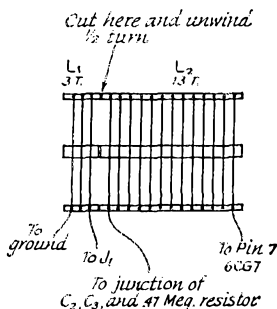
Drawing of the L-match coil assembly. The assembly is made from a single length of B & W Mini-inductor coil stock type 3007,  $\frac{3}{8}$ -inch diameter, 16 turns per inch, No. 20.
